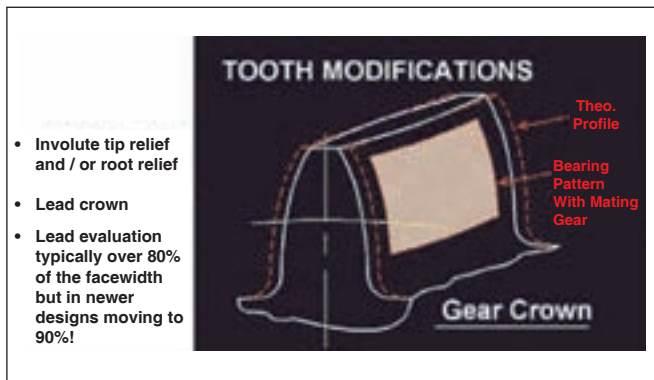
Load distribution: Because of varying load, tooth and gear blank/shaft bending under severe loading, there is a need to create gear tooth modifications.
